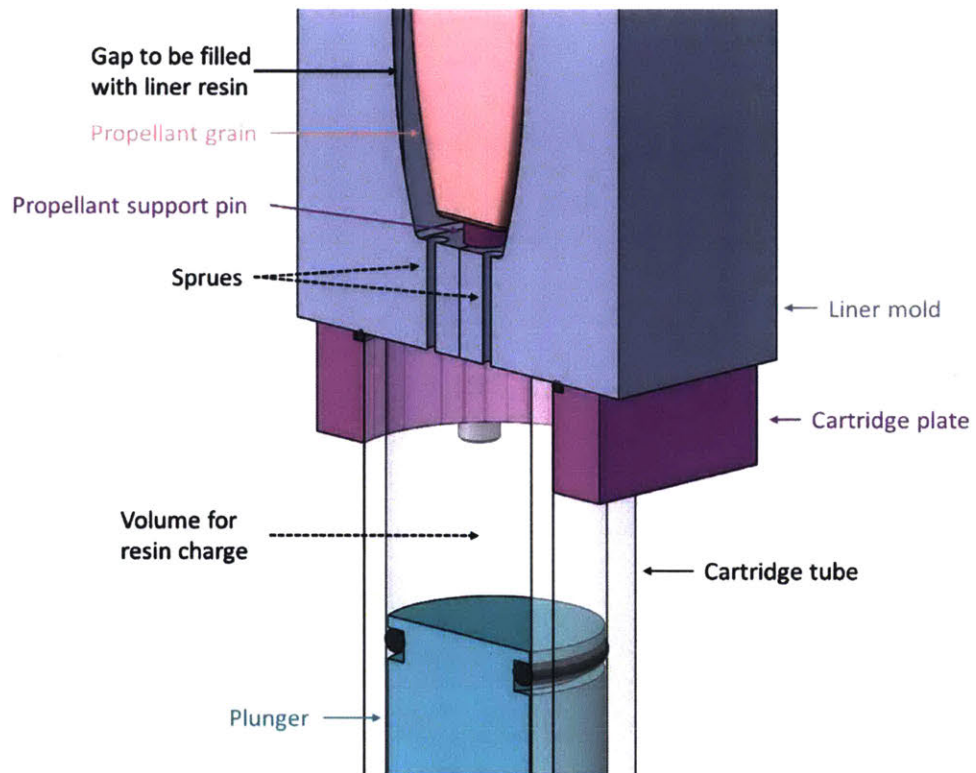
This cutaway view shows the volume of the cartridge which is filled with the resin charge, and the sprues through which the resin passes to enter the mold.
